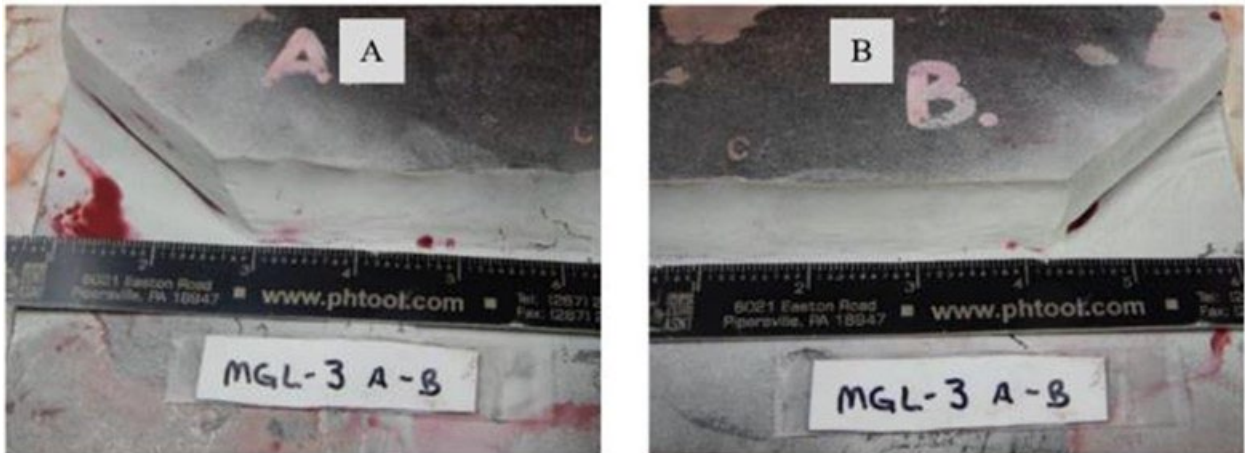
MGL-3-A-B simulated fatigue crack fillet weld MG panel
